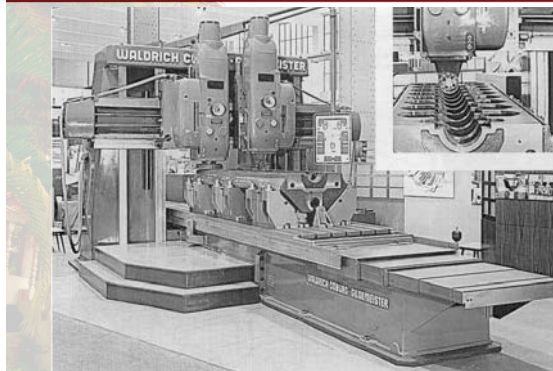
Bed-type vertical spindle heavy duty production machine tool for milling.
